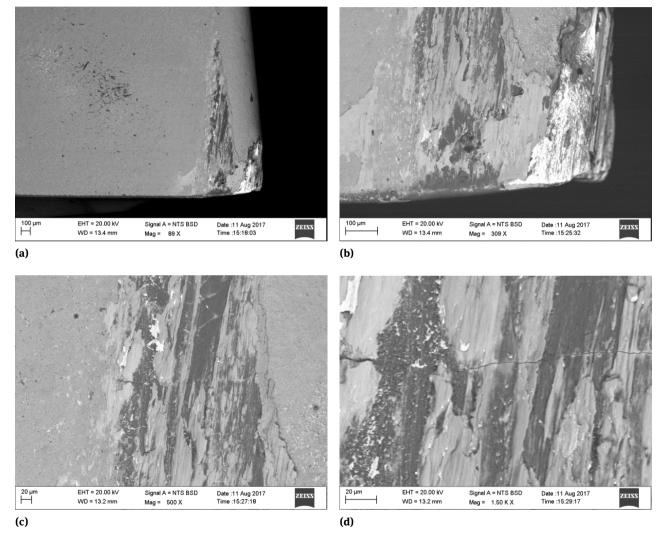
SEM images of the worn nose and flank face of the cutting tool for machining under flooded machining condition
